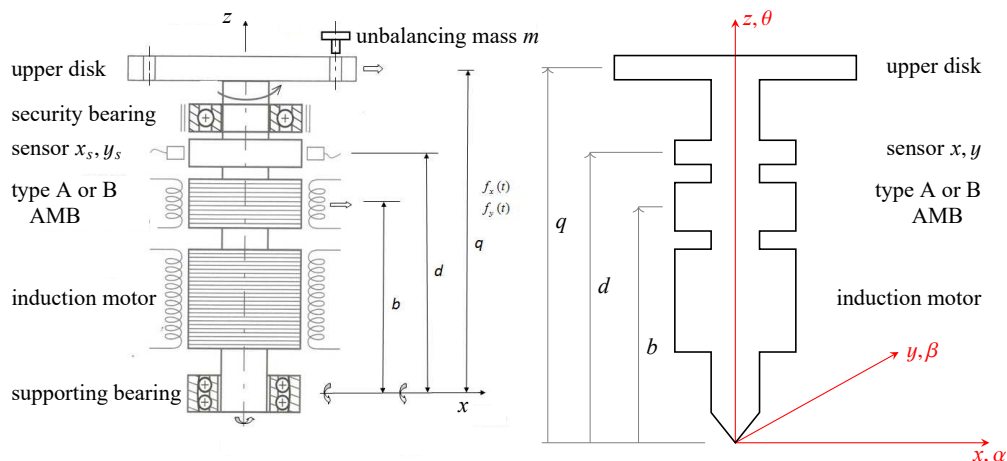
Vertical rotor’s aspects and dimensions, in the left part. In the right half, a simplified representation of its basic geometric aspects and dimensions.
